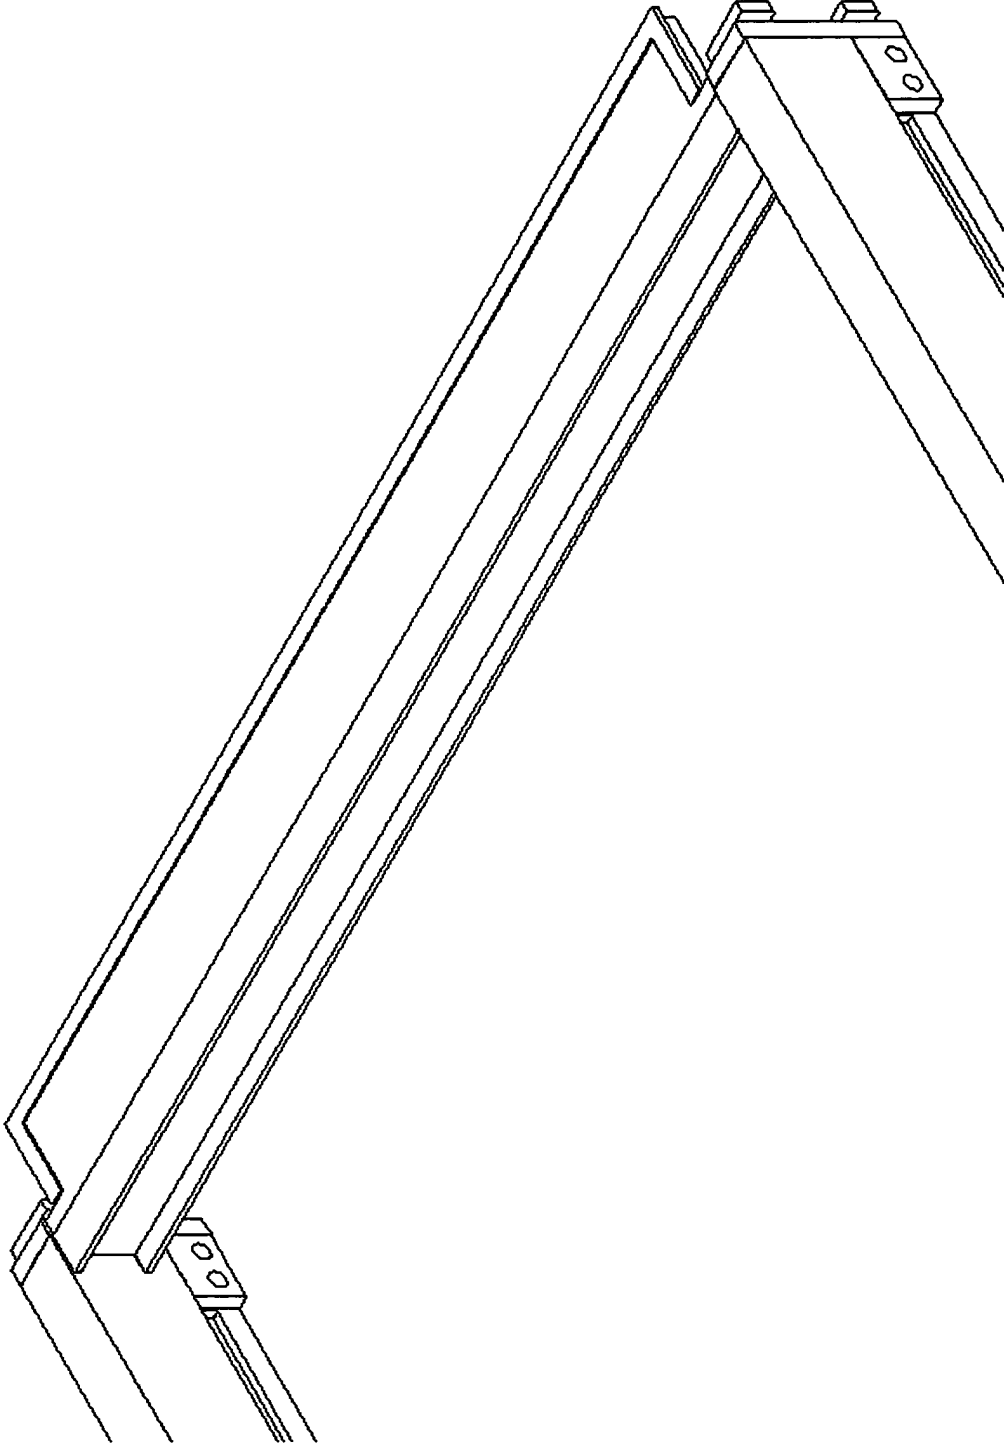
A: Isometric view of the left end of a ceiling frame (40 foot collapsible cargo container)
